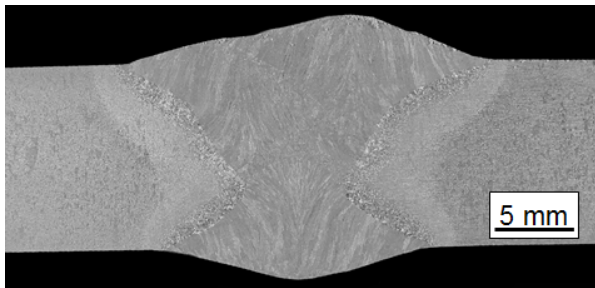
Macrostructure of MAG welded joints made of steel S690QL, 12 runs
